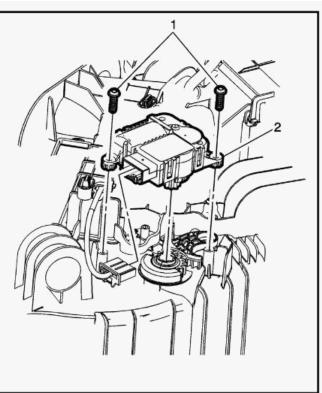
Temperature Valve Actuator - Right Side Courtesy of GENERAL MOTORS COMPANY
